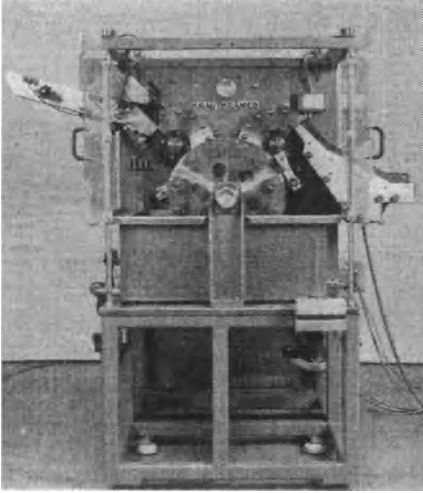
Single-piece tester for small parts such as rings, bolts, tube sections etc. (type PAR-R, design Krautkrämer)
